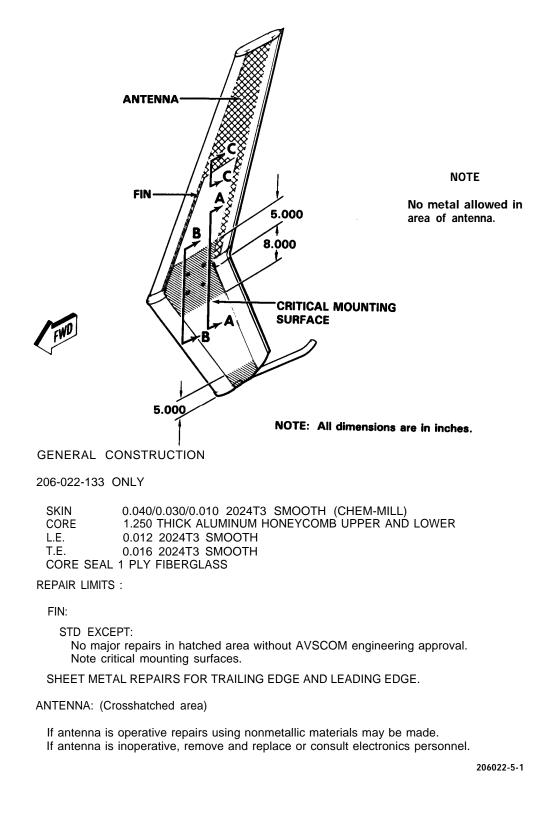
Honeycomb Panels — Vertical Fin Repair (Sheet 1 of 2)
